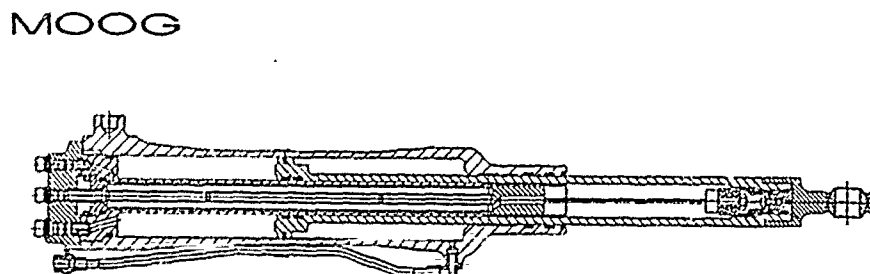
MOOG - Convergent Flap Actuator Detail Drawing
